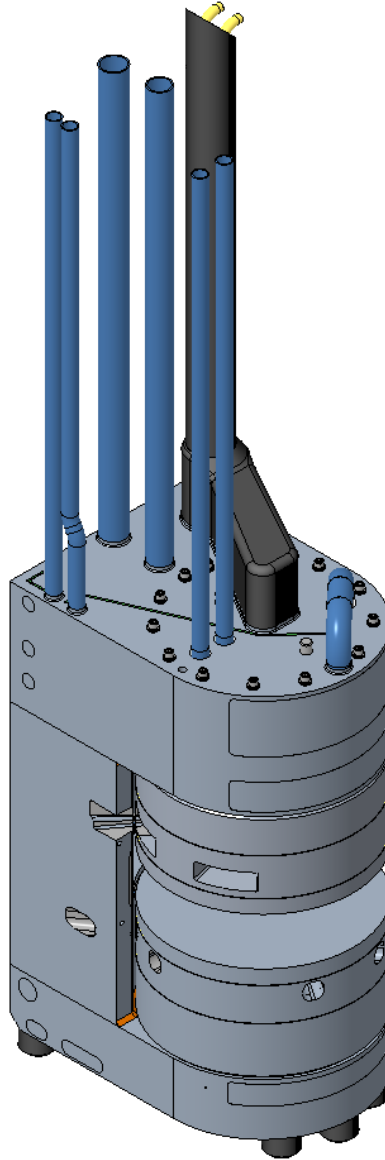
Water piping welded to the backbone water inlets/outlets.
